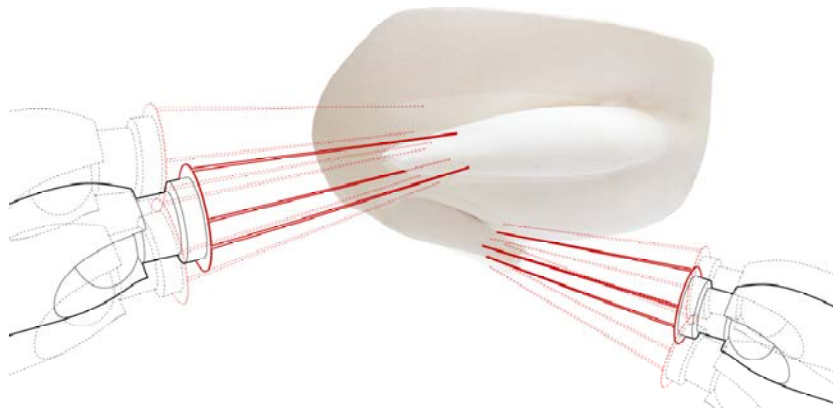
Robots hold pre-cast plaster parts in place to become part of a secondary casting operation.
